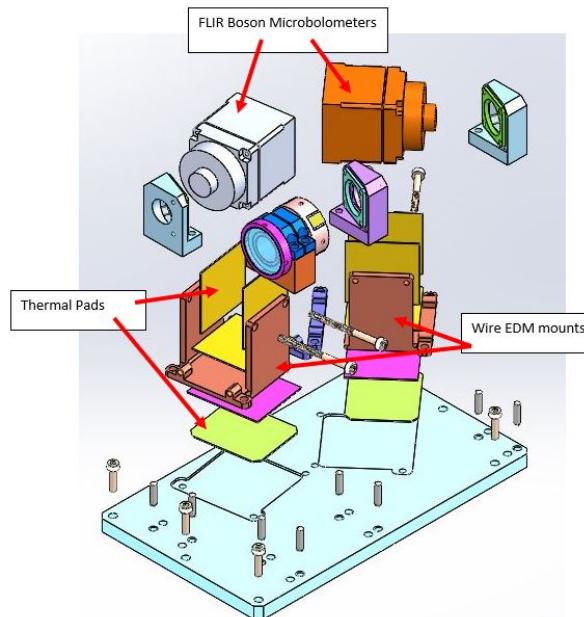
Exploded view of 3D model of IRCSP internal optics. Wire EDM copper mounts interface with the cameras on three surfaces with thermal pads to improve thermal contact.
